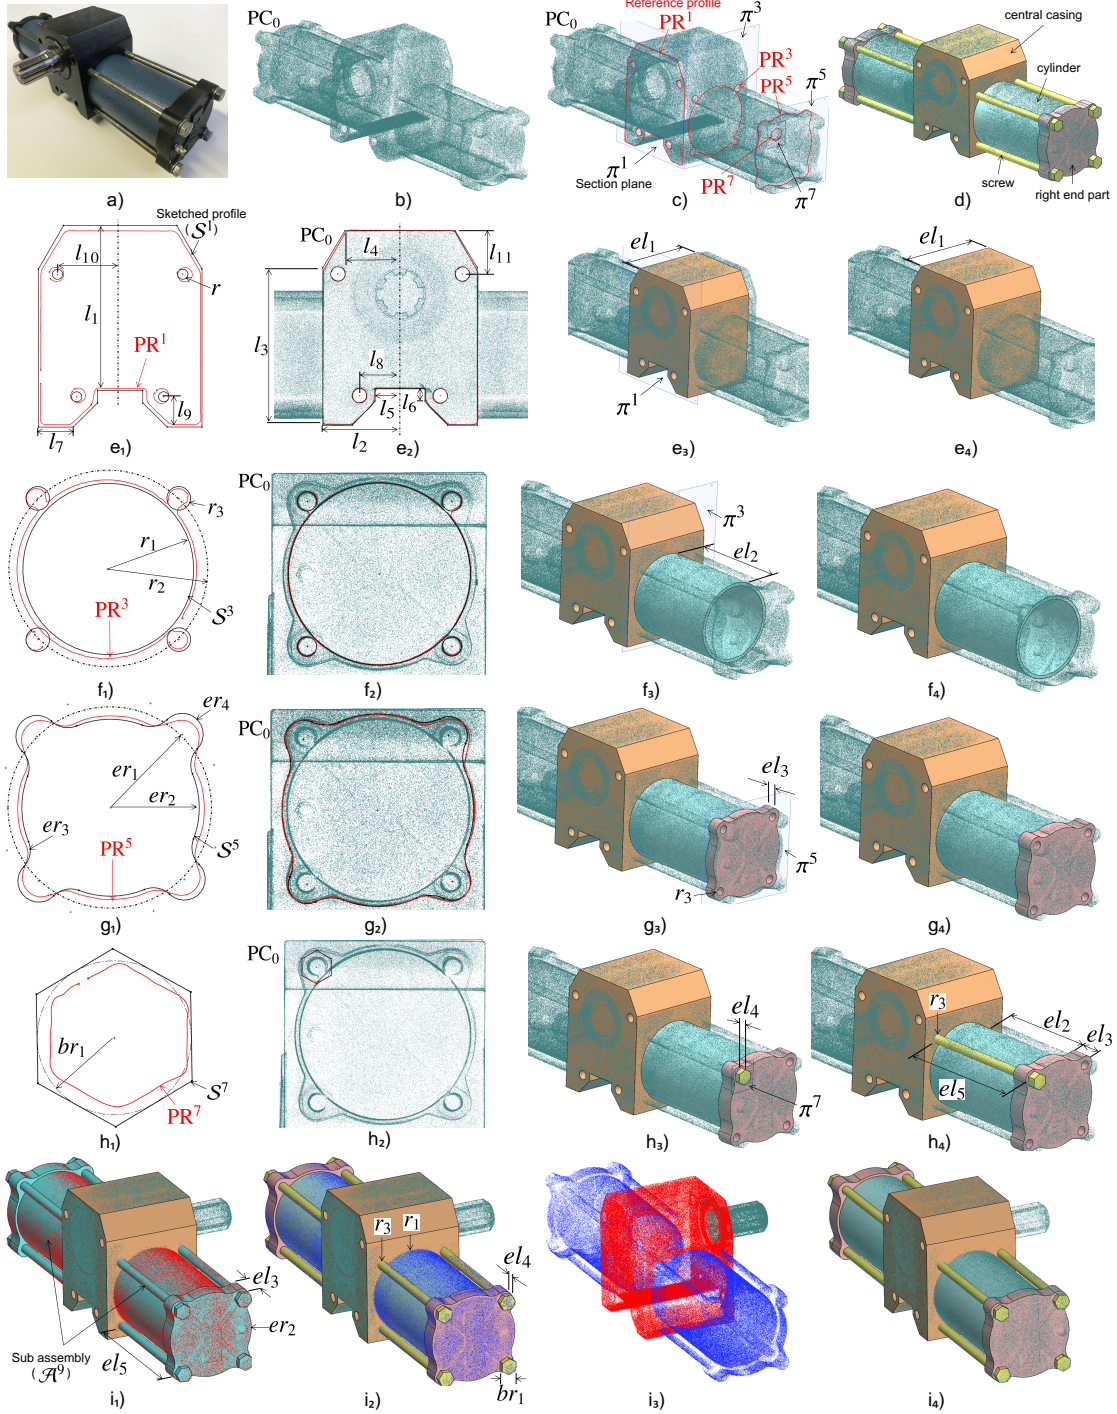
Successive steps of the reconstruction of a hydraulic rotary actuator based on a point cloud obtained using a laser scanner without disassembling the parts.
